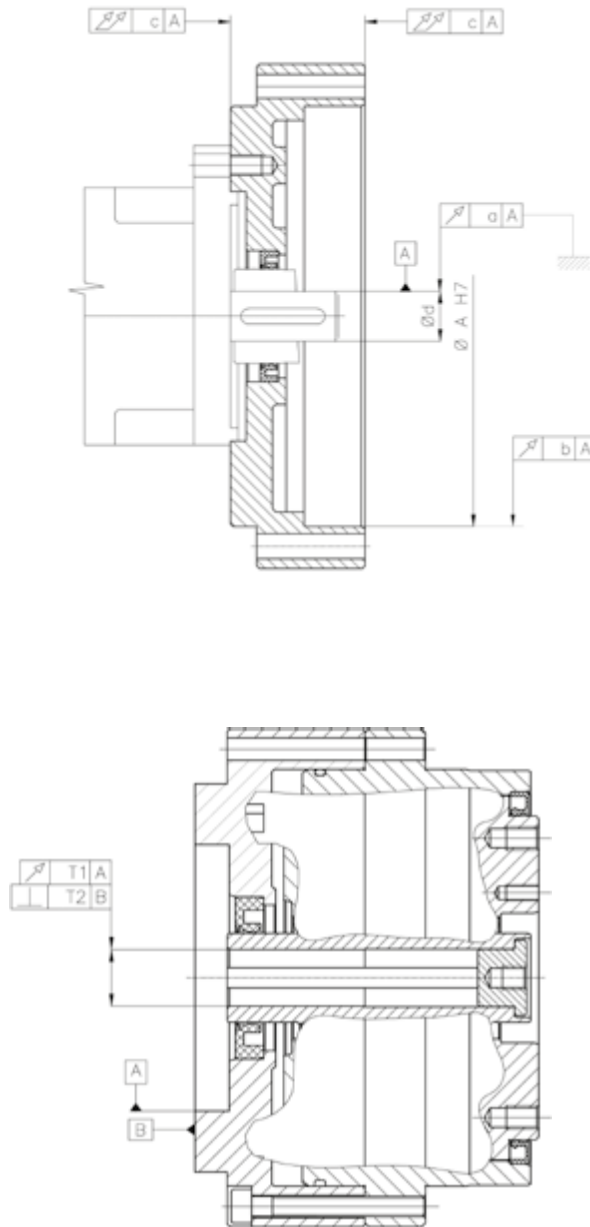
Geometric deviations for the connection of the E series TwinSpin high precision reduction gear flange with a motor or of the TwinSpin E series reduction gear
